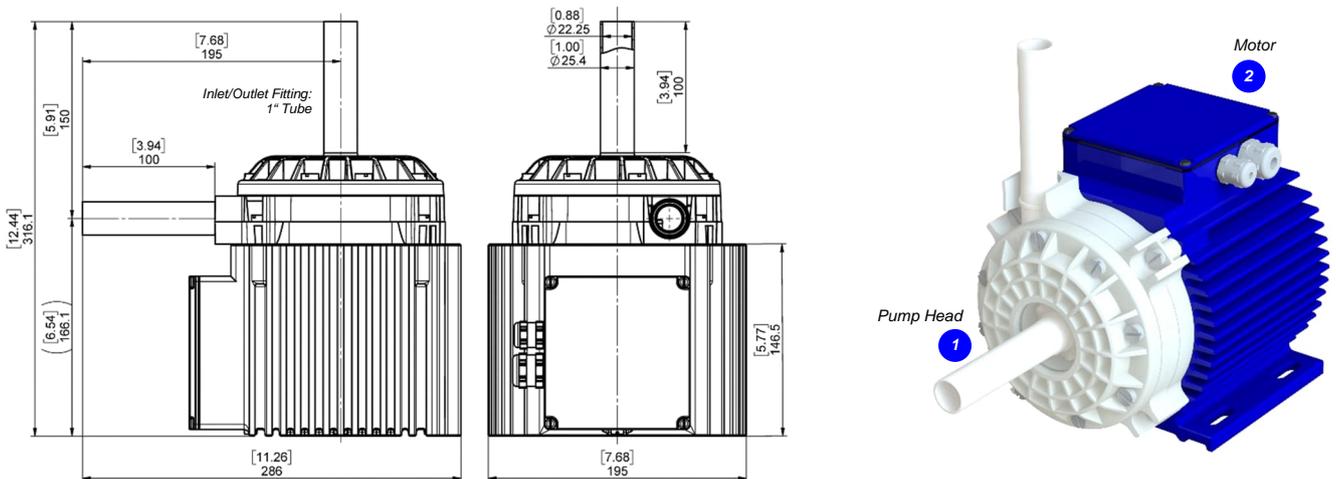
Dimensions of motor LPM-2000.12 with pump head LPP-2000.16
